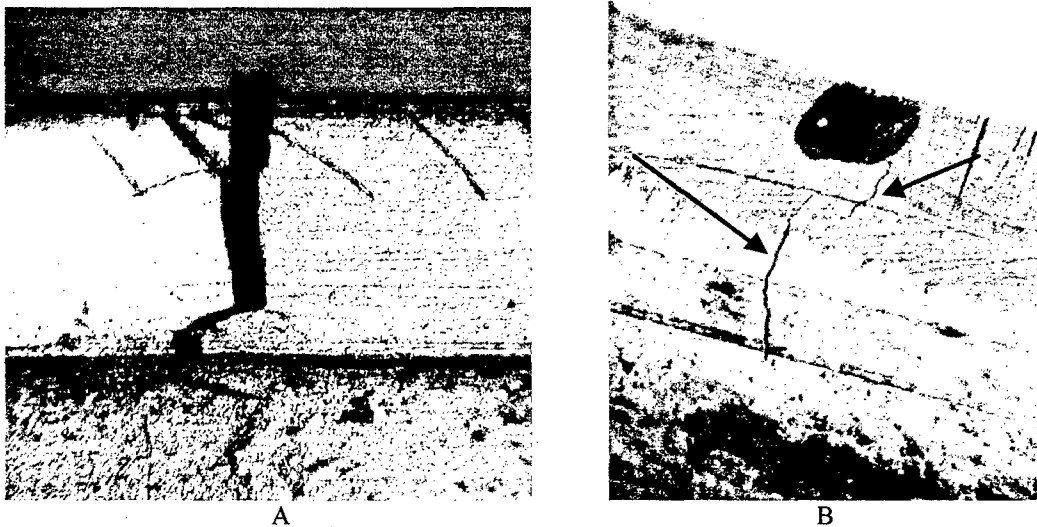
Examples of two of the cracks revealed in the section removed from the port wing-attachment hole upper aft edge. Both of these views were taken with the cracking loaded. View 'A' shows a ridge on the hole surface – the fatigue part of the crack is the vertical part, that which follows is tearing due to the applied opening load. In 'B' the corner is roughly in the middle of the field with the hole-surface on the lower side and the aft face of the bulkhead on the upper side. Note that two cracks exist in this location, the second independent of the hole surface or edge.
